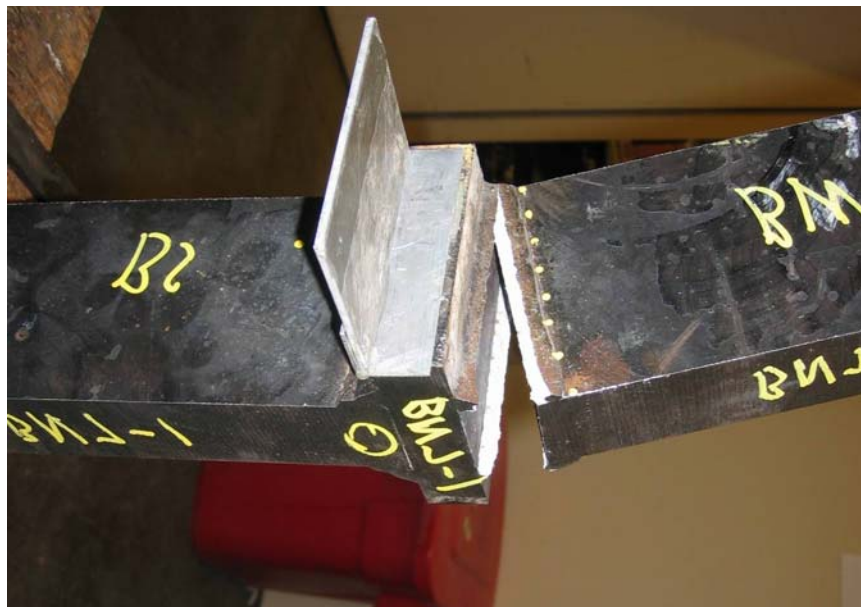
A photograph of a fractured specimen (Test #43 - 1.75 inch root notch, non-toughness 5/16 inch weld, 8.5 inch eccentricity)
